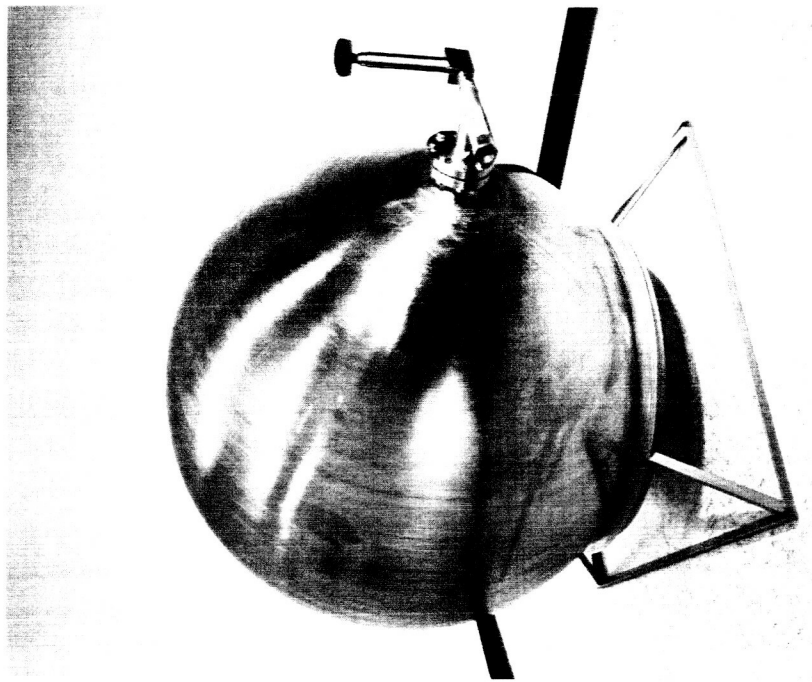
51-INCH DIAMETER SPHERE SHOWING FILL VALVE
